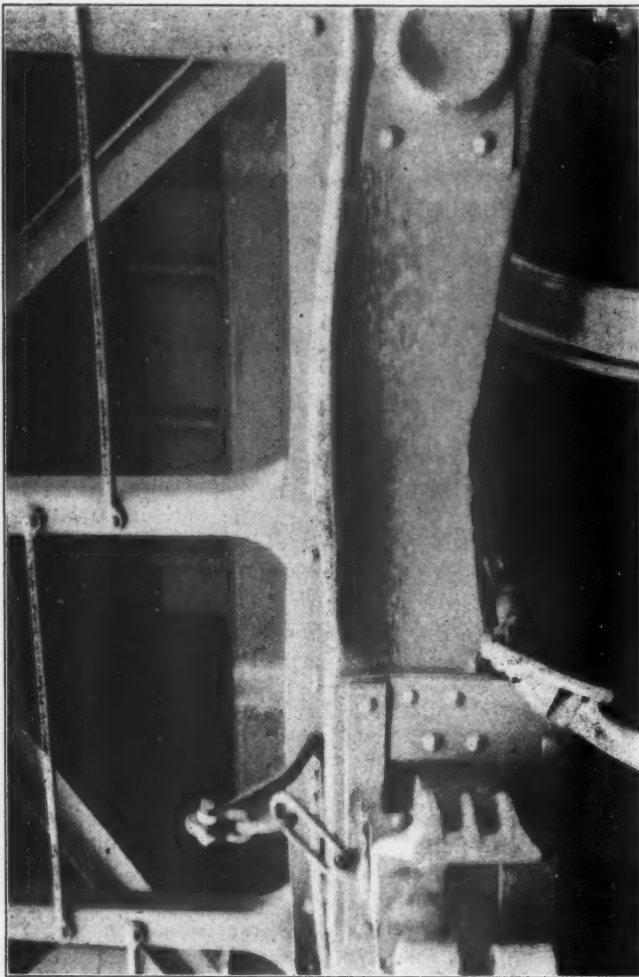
BADLY BENT END SILL ON HOPPER CAR.
